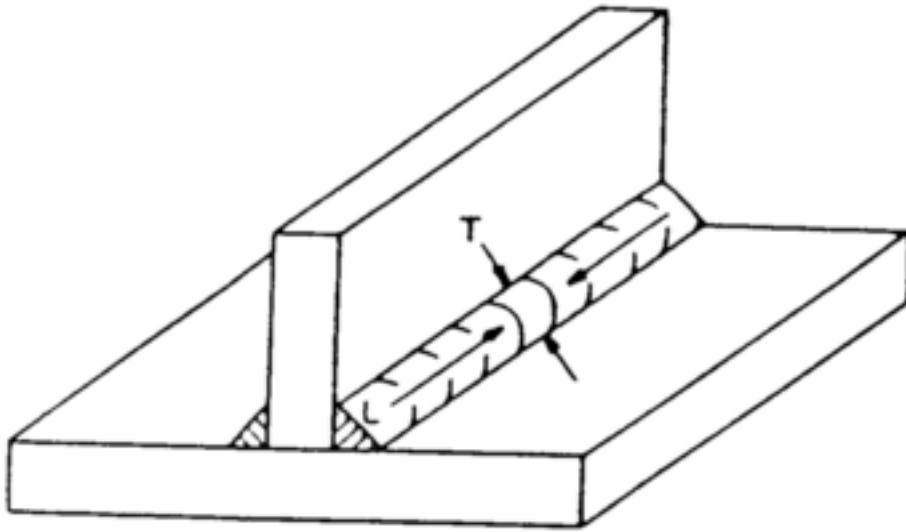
Longitudinal (L) and transverse (T) shrinkage stresses in a fillet weld.
